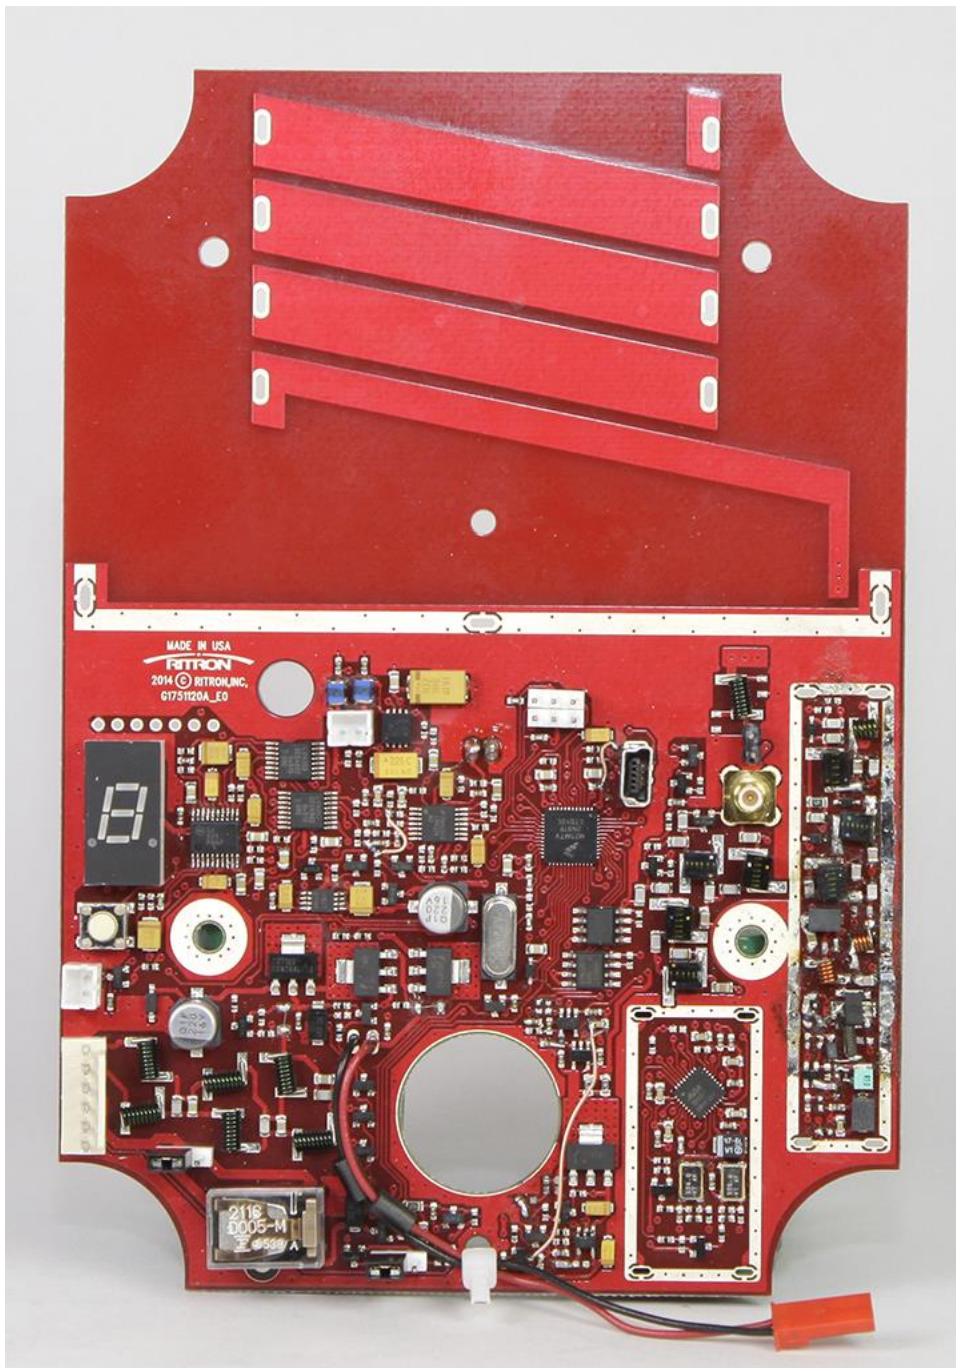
M complete top side PCB assembly with shields and internal antenna removed
